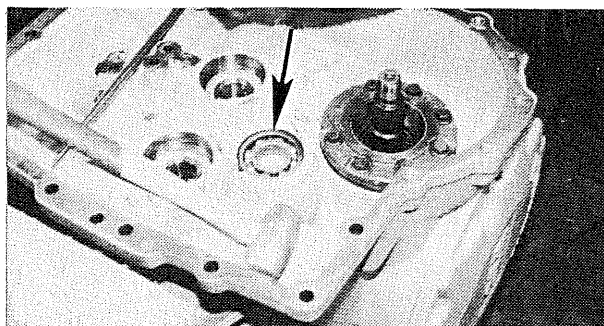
Ring Gear, Pinion and Drum Shaft (3 of 5)
